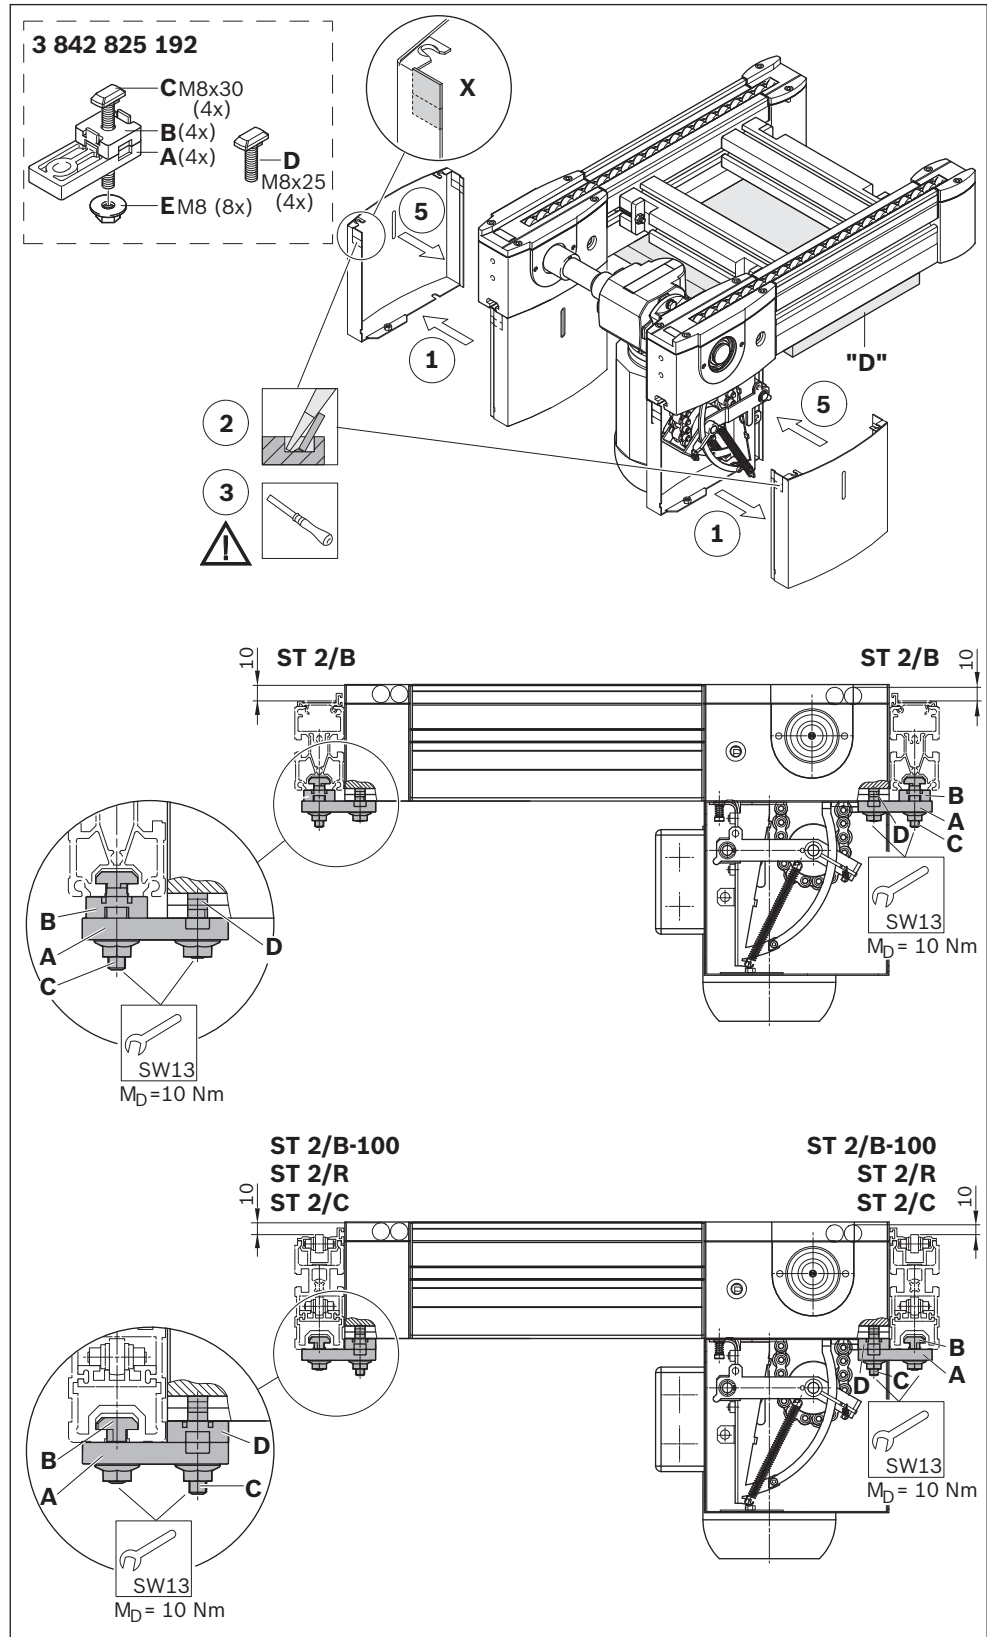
BS 2/C-100, ... : Assembling the belt section between two sections
